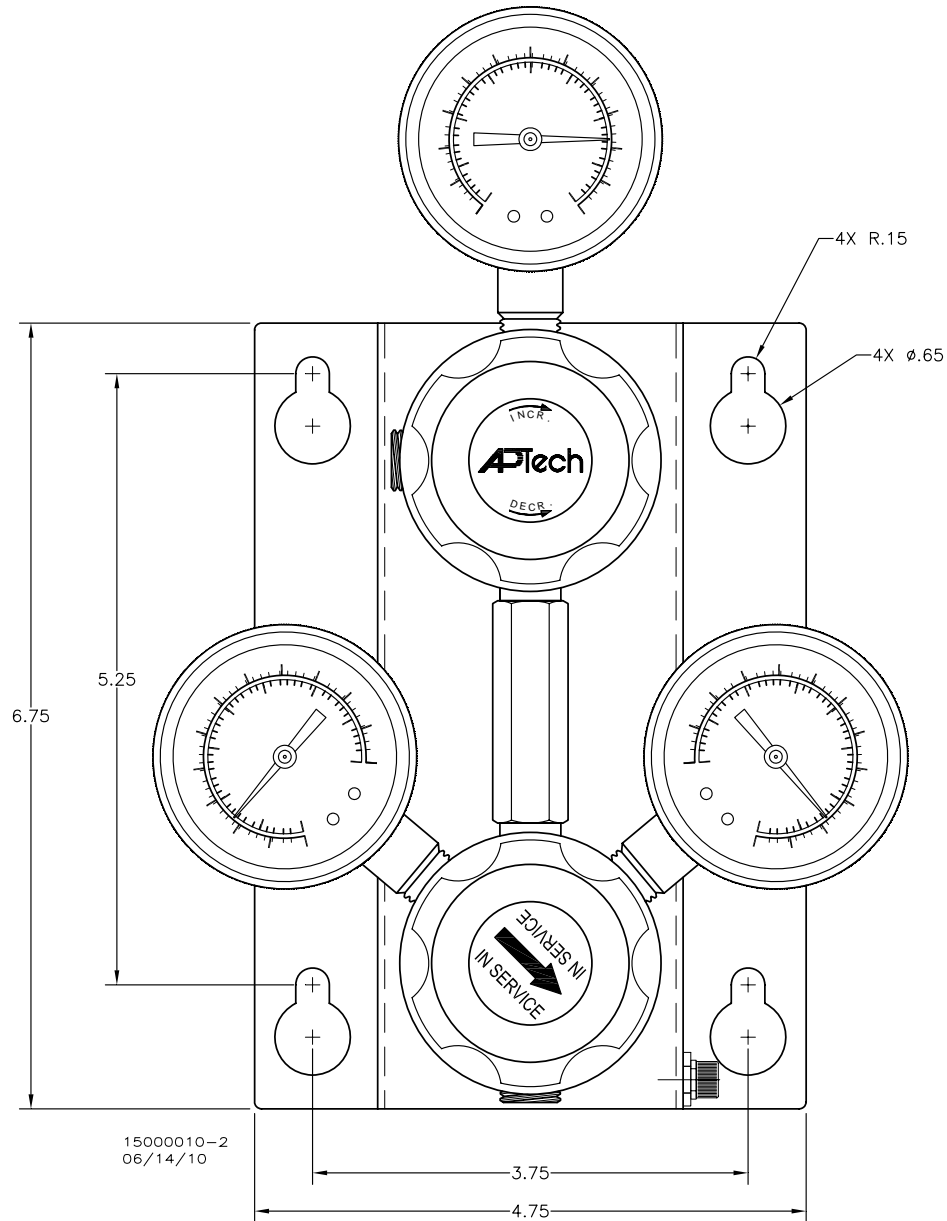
AK M80/86 Crossover Manifold Mounting Hole Pattern
